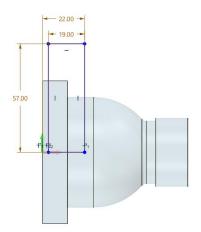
Sketching a rectangle on the XZ Datum Plane
